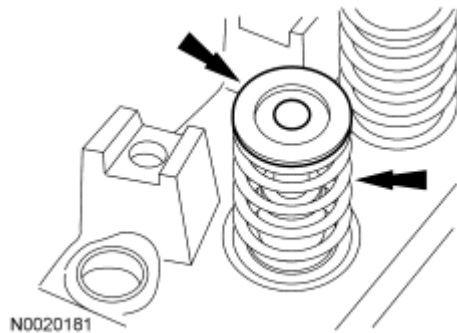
Locating Valve Spring & Valve Spring Retainer
